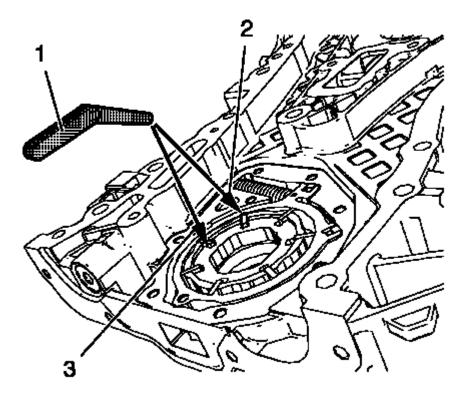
Straight Edge Tool Courtesy of GENERAL MOTORS COMPANY
